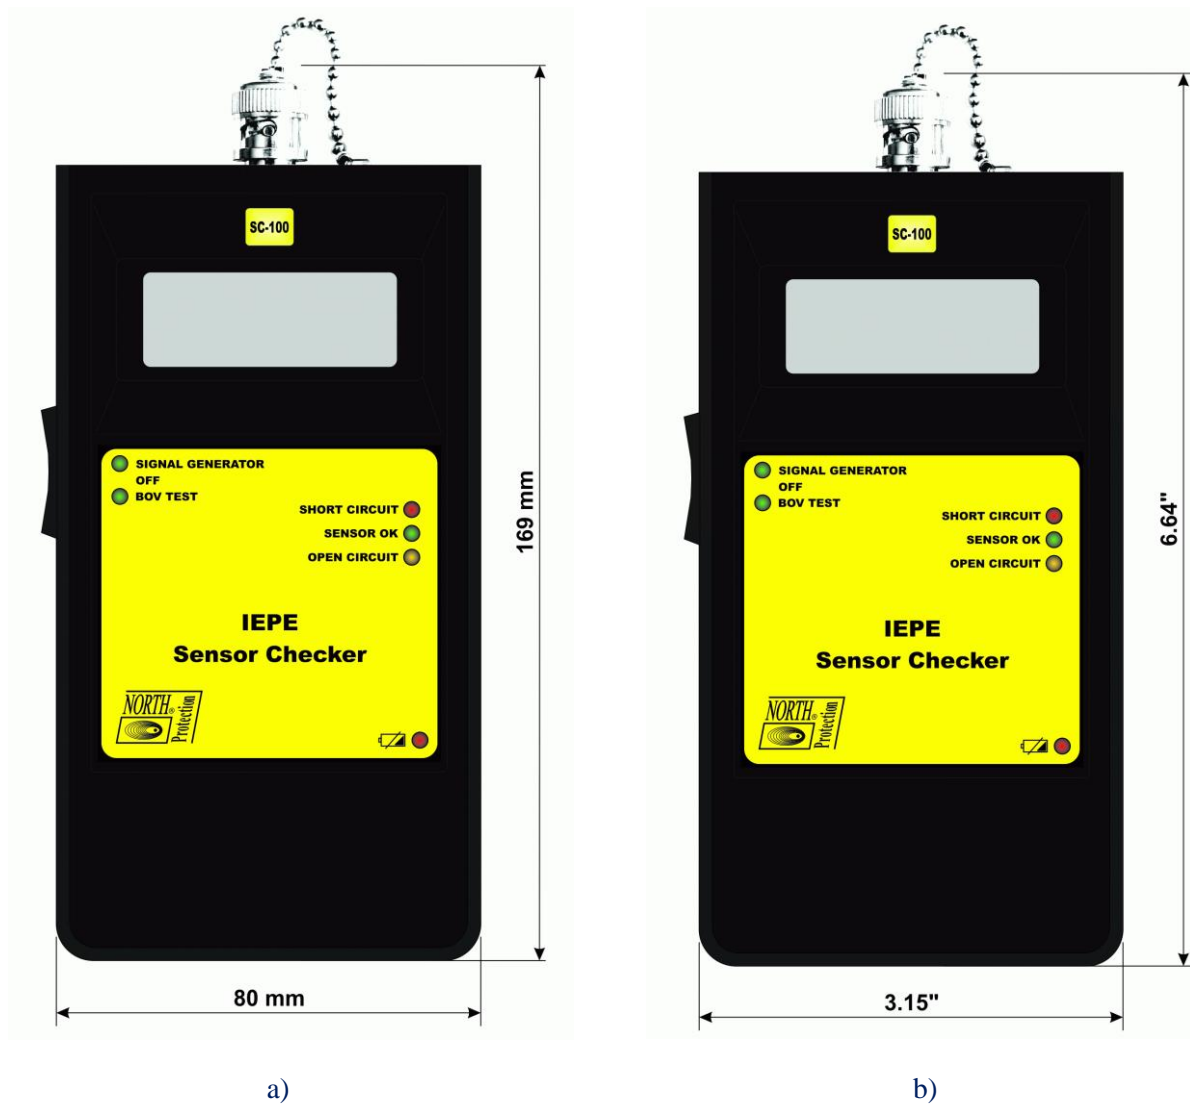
Device Dimensions - a) in millimeters, b) in inches
